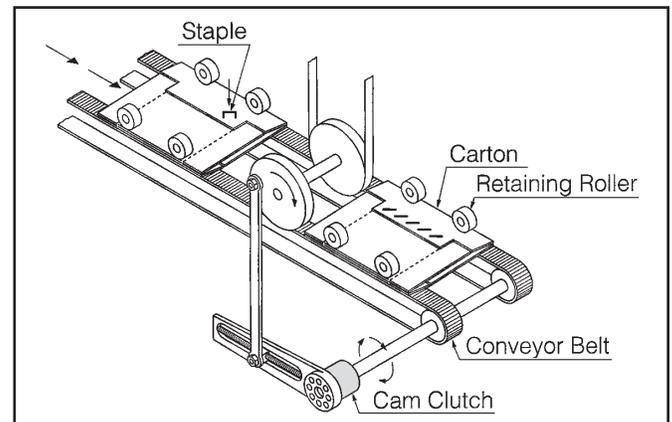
Common roll feeding device utilizing indexing and backstop Cam Clutch
